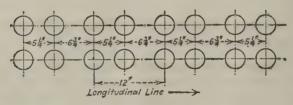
Example of Tube Spacing with Pitch of Holes Unequal in Every Second Row
